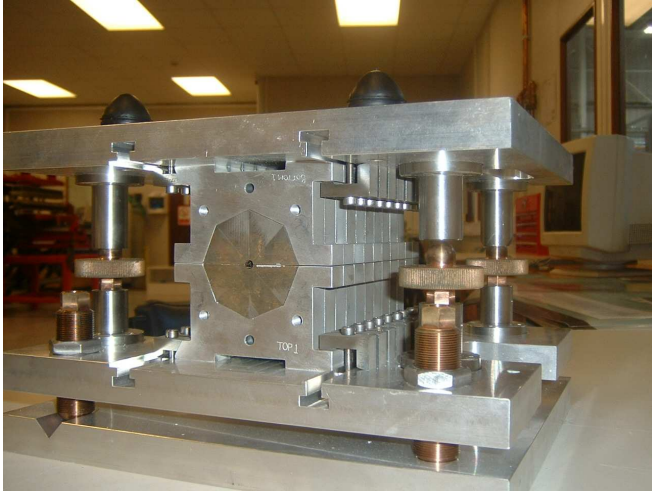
(Color) Photograph of completed PM ring undulator assembly, with ten 14 mm periods.
